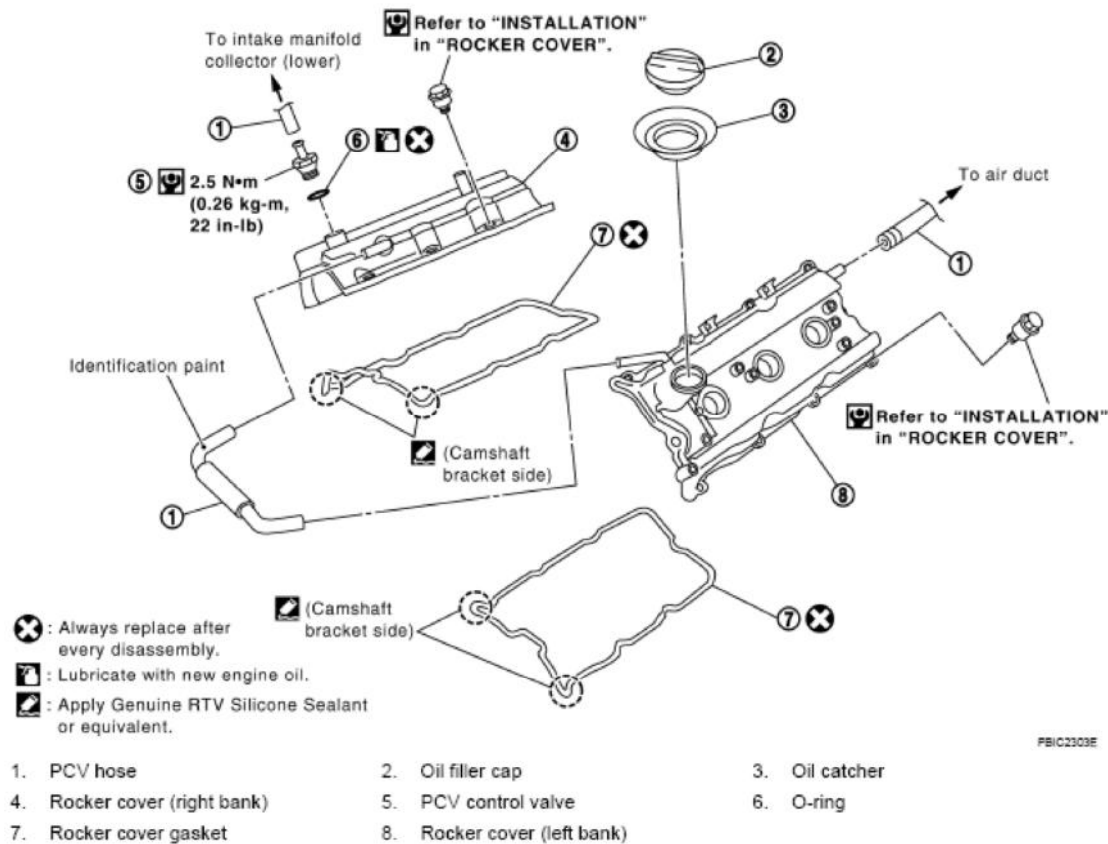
Identifying Rocker Cover Components With Torque Specifications
